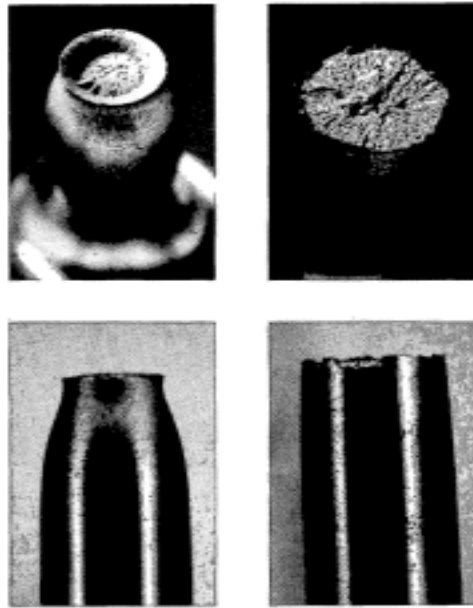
Ductile (left) and brittle (right) tensile fractures [31]
